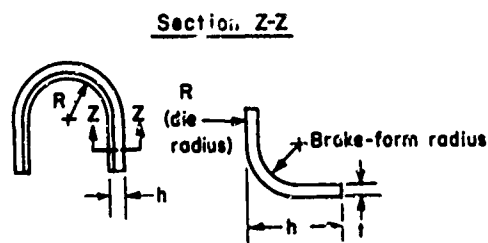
STRETCH-FORMED SECTION (OUTBOARD)<sup>(3,4,5)</sup>
